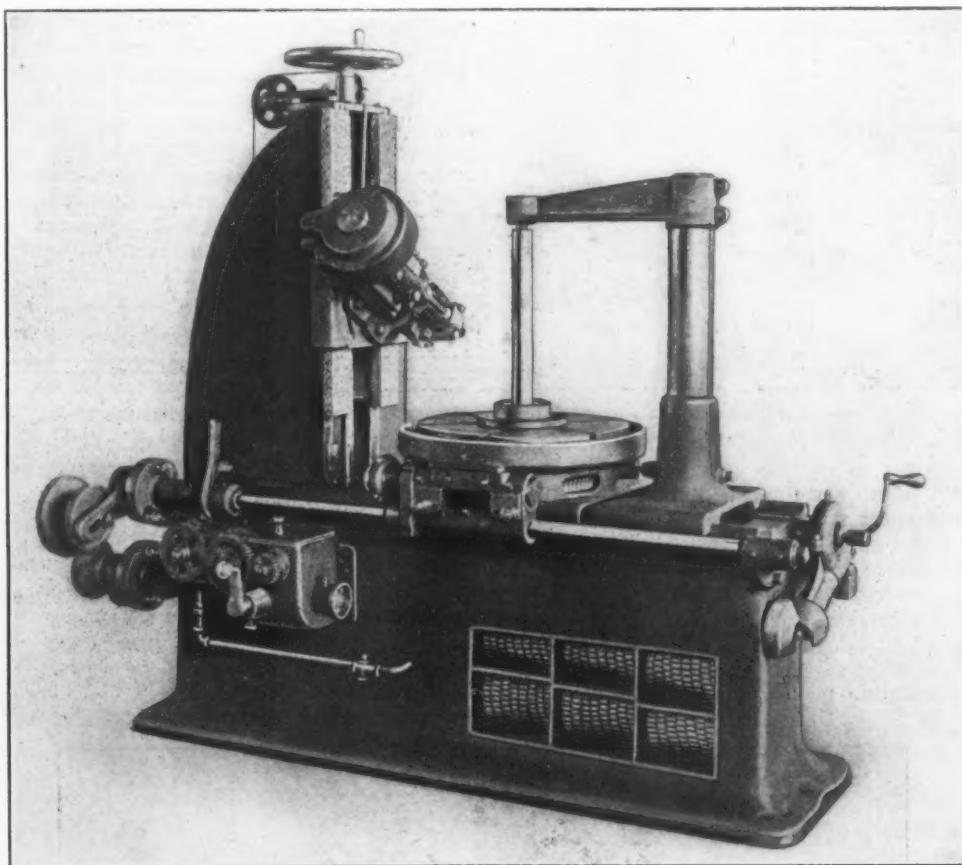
View of the Working Side of the Gould & Eberhardt Gear Generator.
